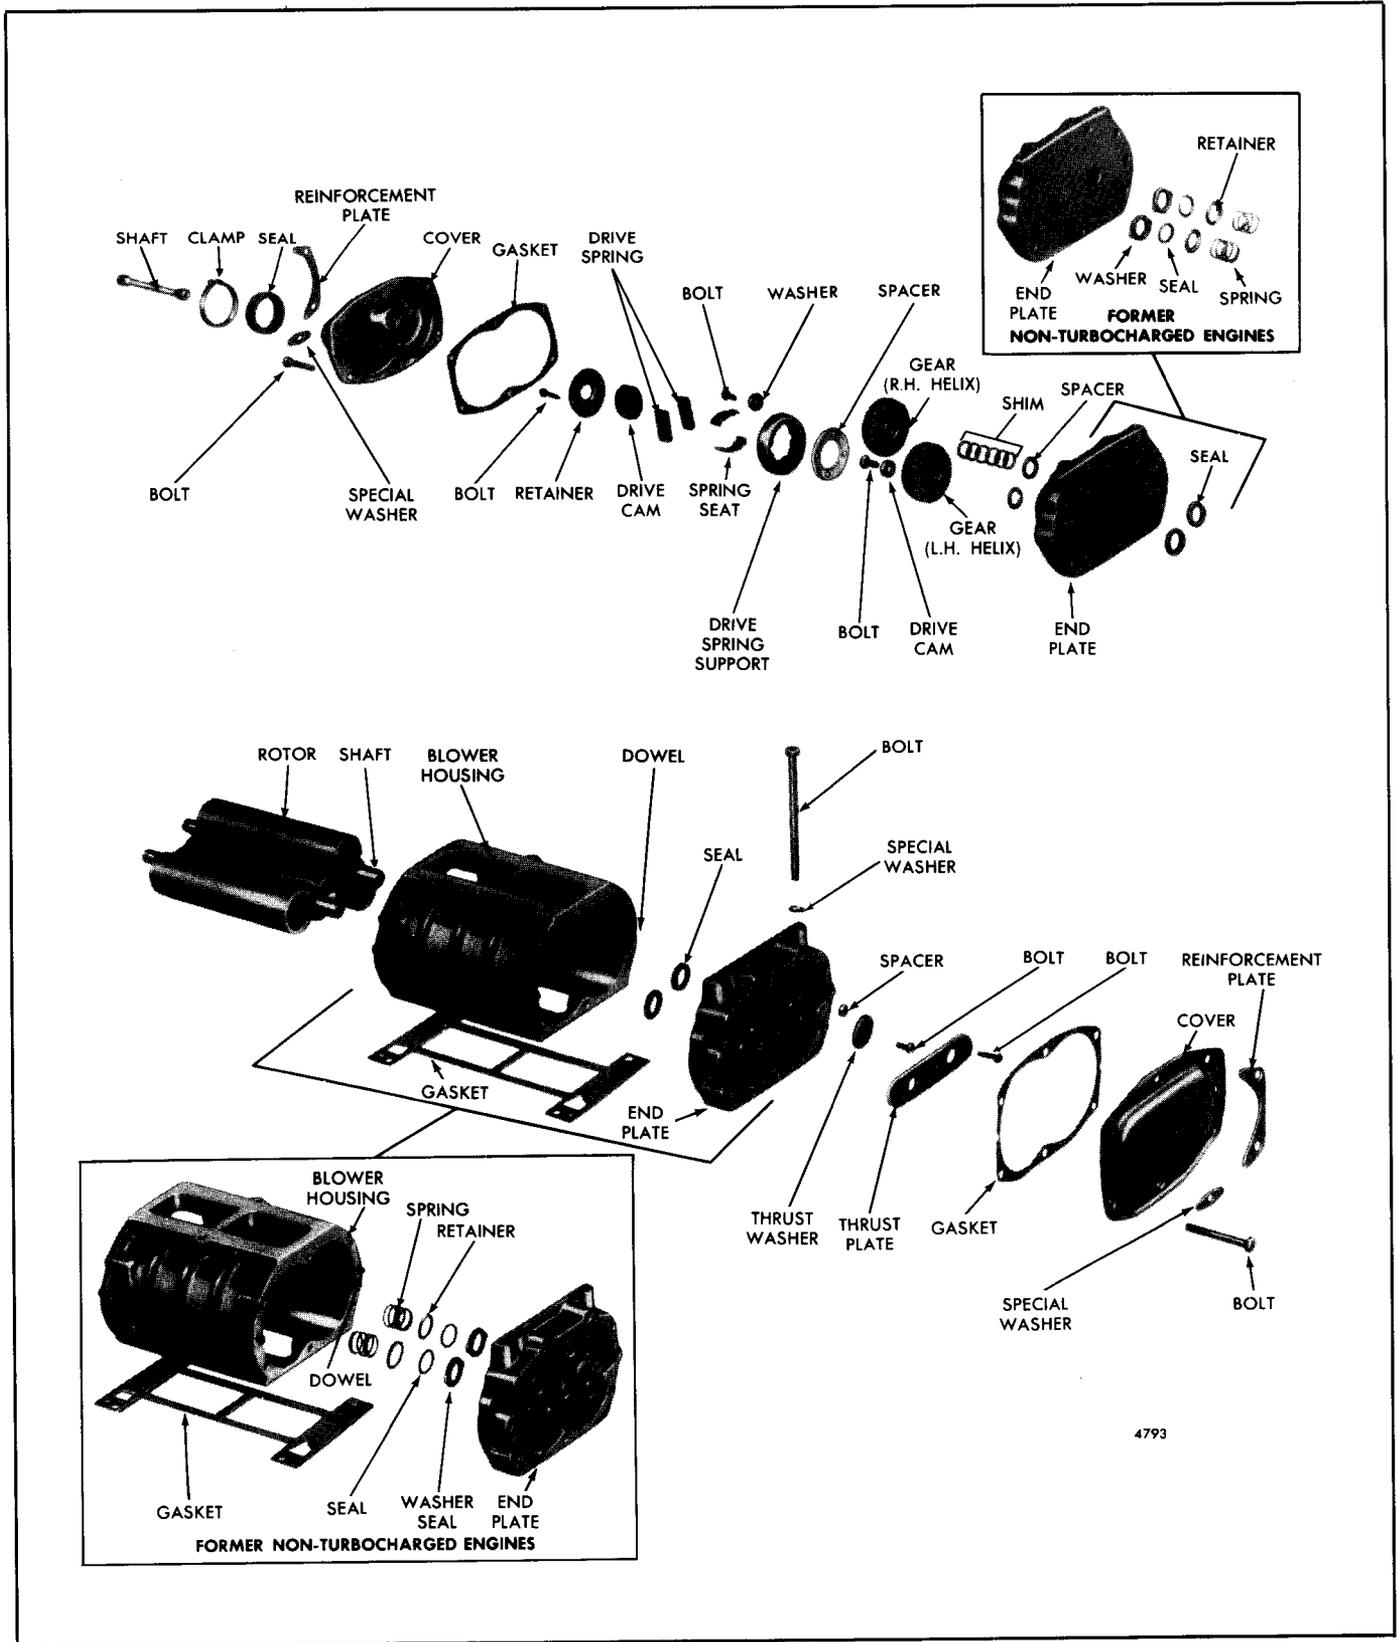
Typical Blower Details and Relative Location of Parts (4-53 Engine Blower)
